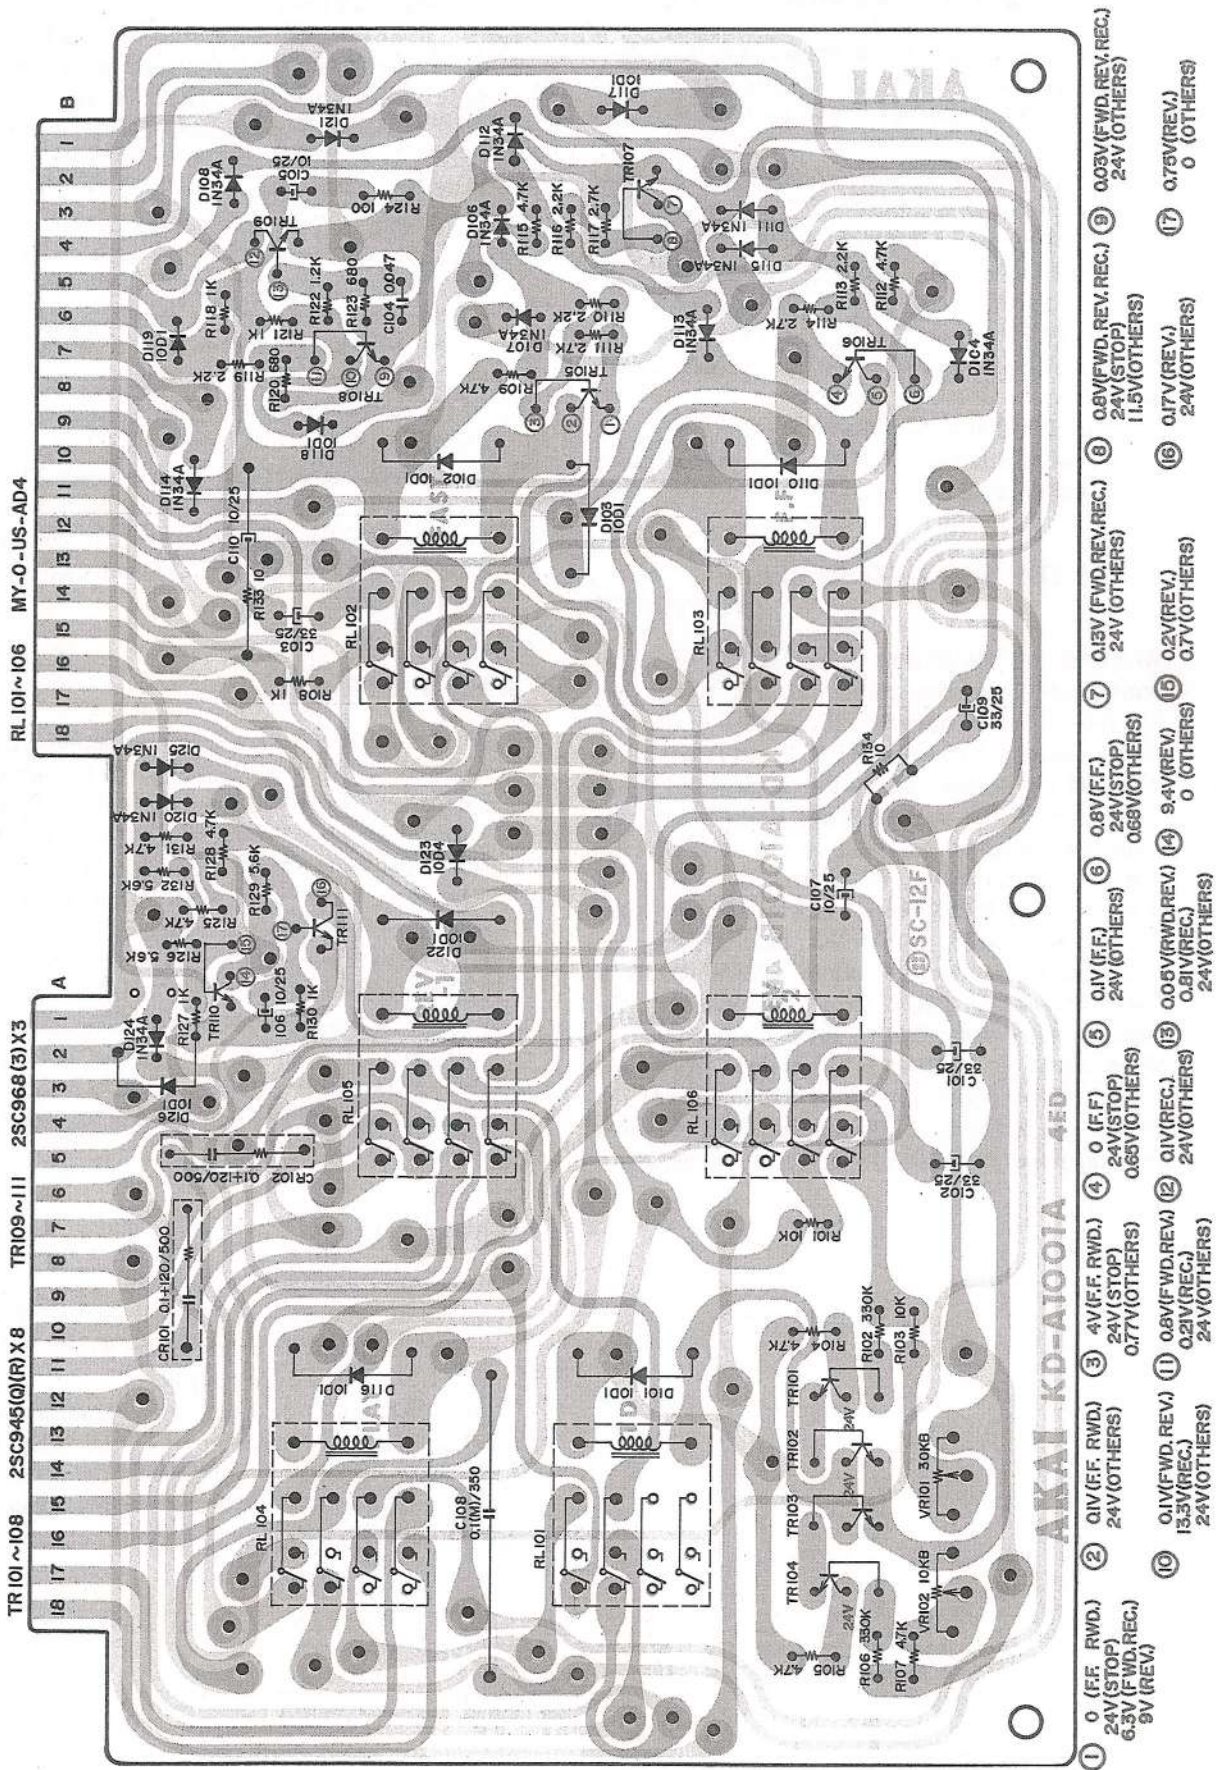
SYSTEM CONTROL P.C. BOARD KD-A1001 (REVERSE SIDE)
